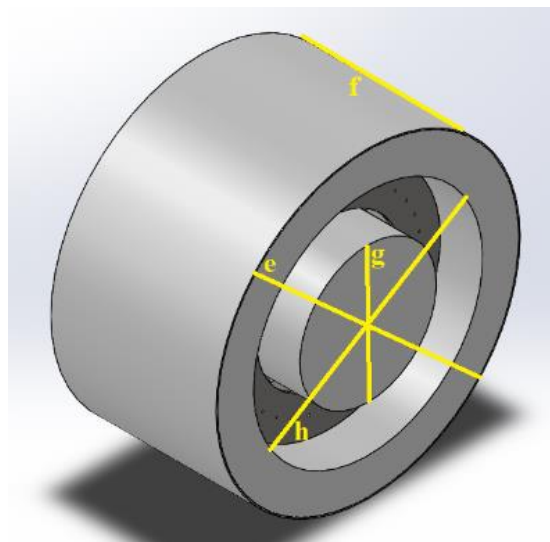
Perspective View of the Mechanical Drawing of the PHALL II-C Thruster
